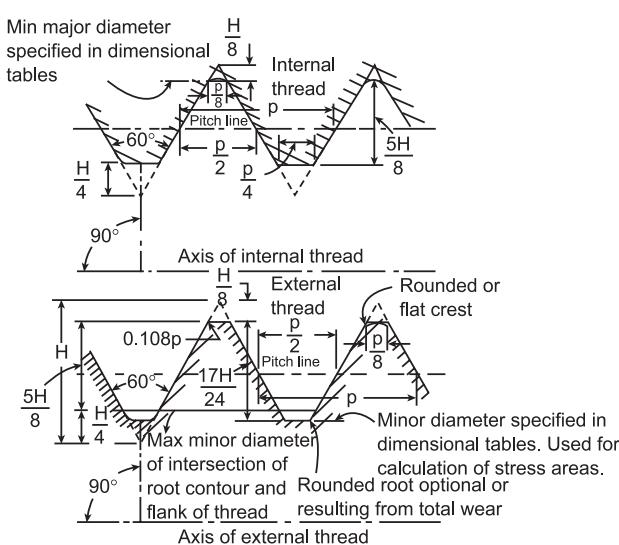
60° unified and American Standard screw-thread forms.
